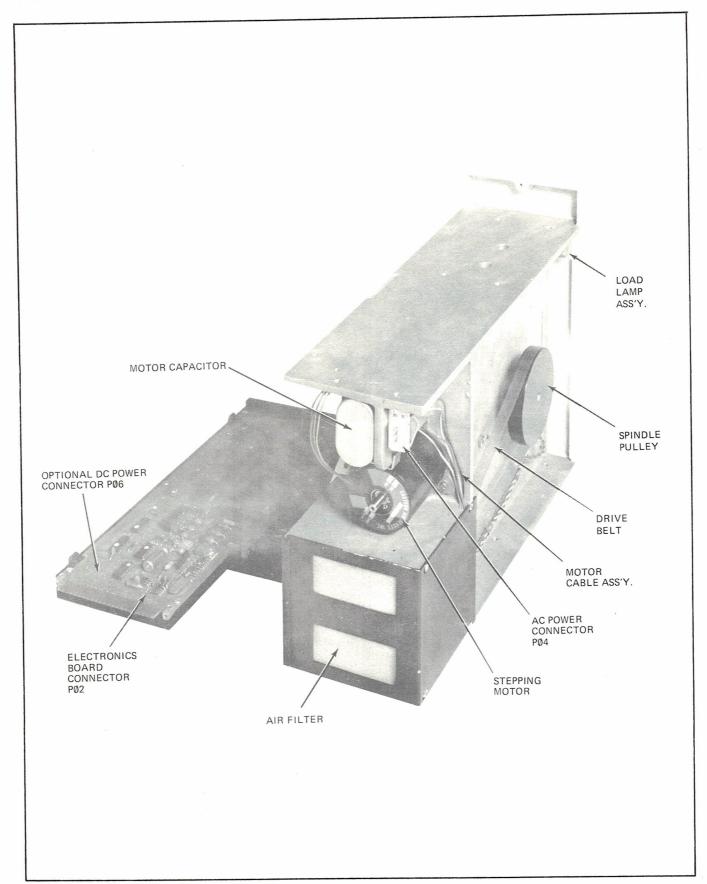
MAJOR ASSEMBLIES (Rear View)
